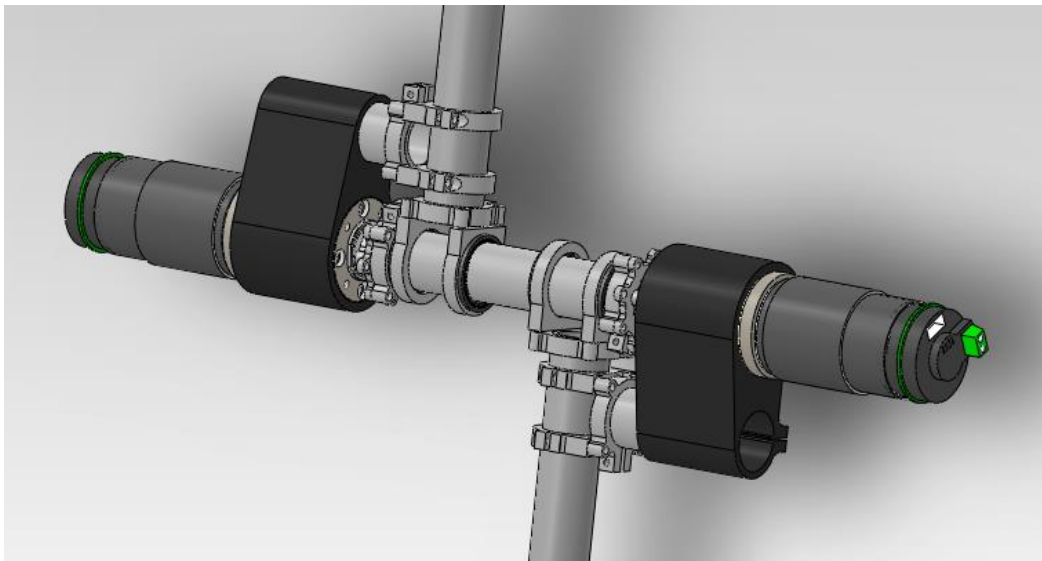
The full elbow assembly, showing the two motor assemblies connected by the central shaft.
